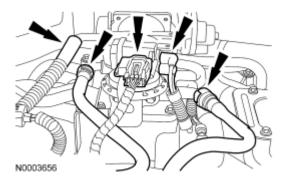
Vacuum Hoses & Electrical Connector Courtesy of FORD MOTOR CO.
